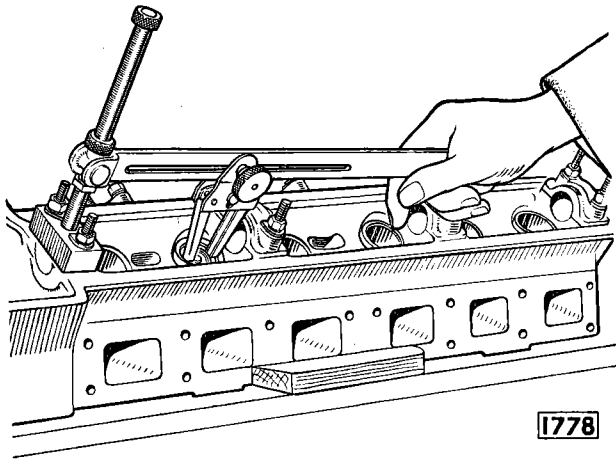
Fitting the valve springs utilizing the valve spring compressing tool (Churchill Tool Number J.6118)
